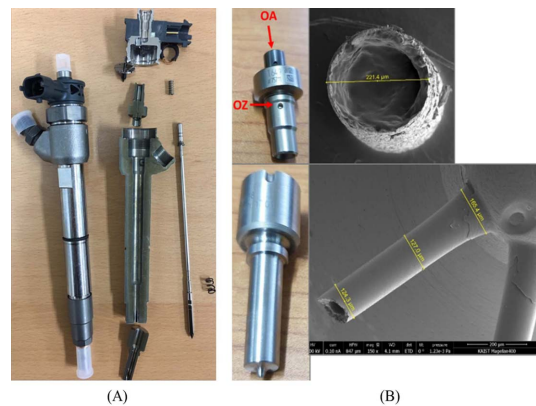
Reverse engineering for dimension acquisition with direct imaging (A), silicone molding method (B)
